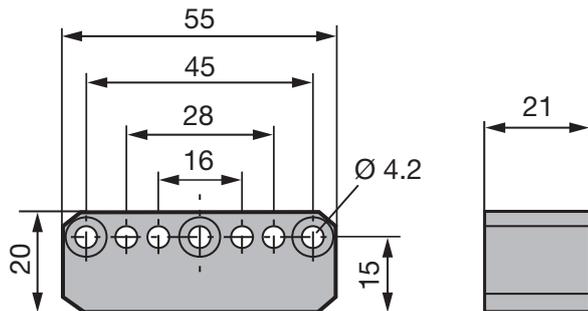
Installation dimensions of BTL5-P-5500-2 magnet
